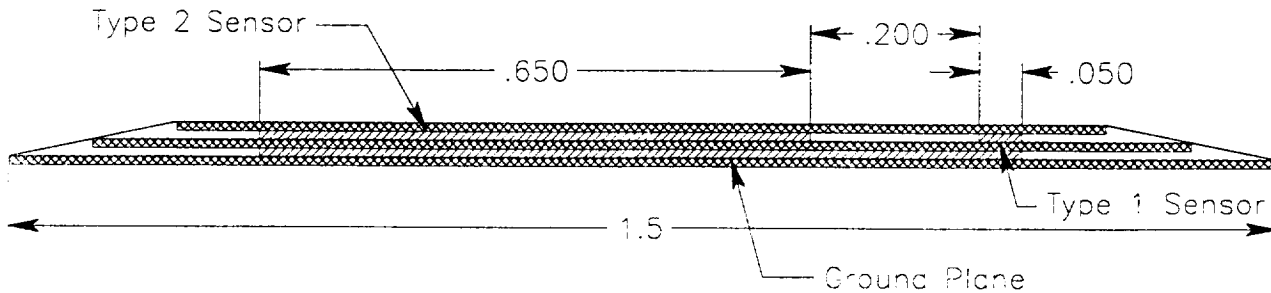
Cross-sectional view of the rigid sensor showing the Type 1 and Type 2 electrodes.
